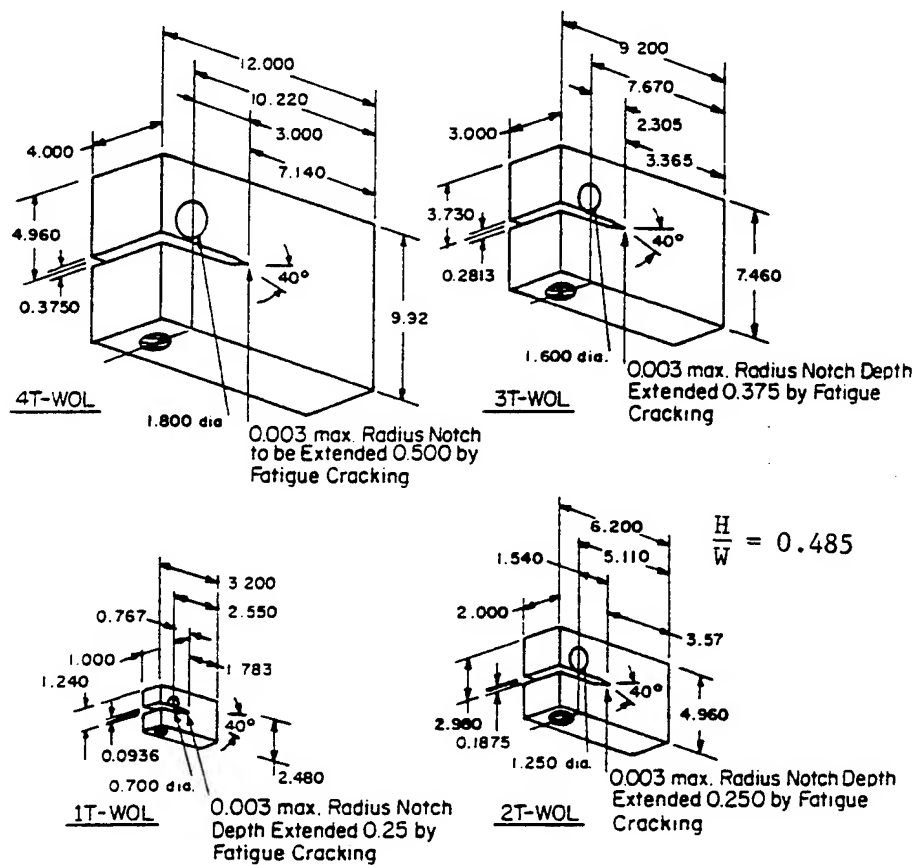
Dimensions of Several T Type Wedge Opening Load (WOL) Specimens.
